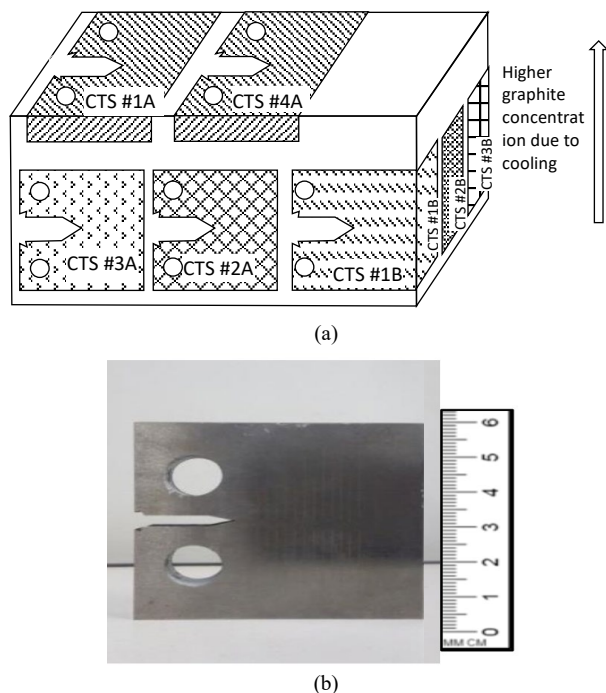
Details of the specimens: (a) block removal location (b) Specimen geometry.
